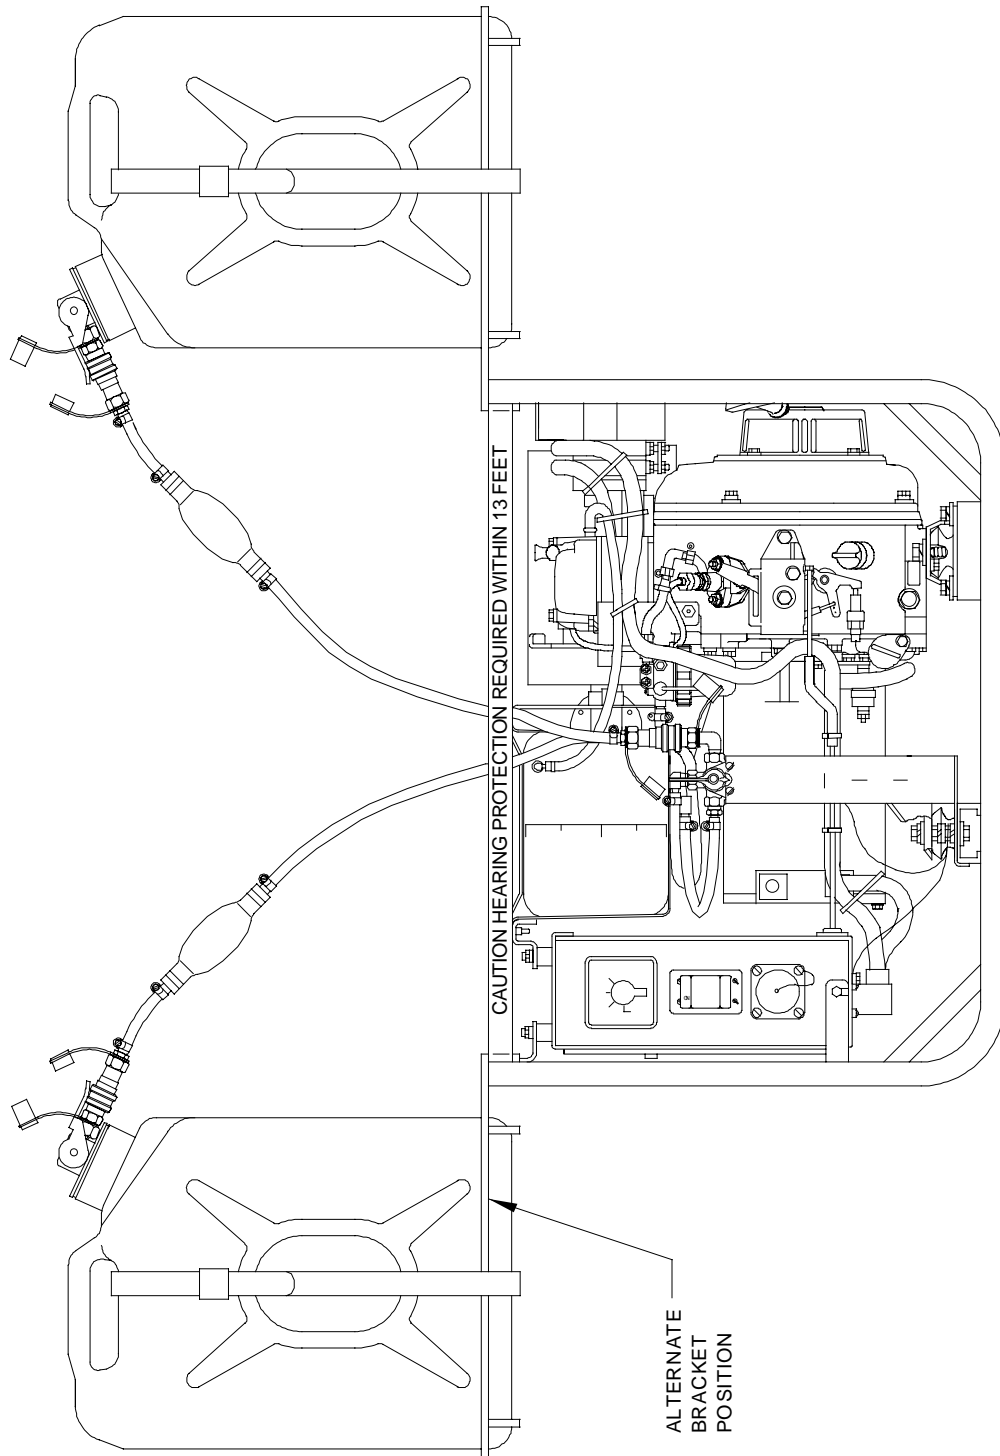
2 KW Set with Auxiliary Fuel System Installed
